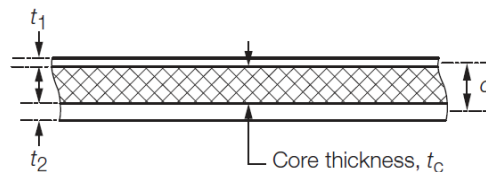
Steel Sandwich Panel Scantling Definition [1].
